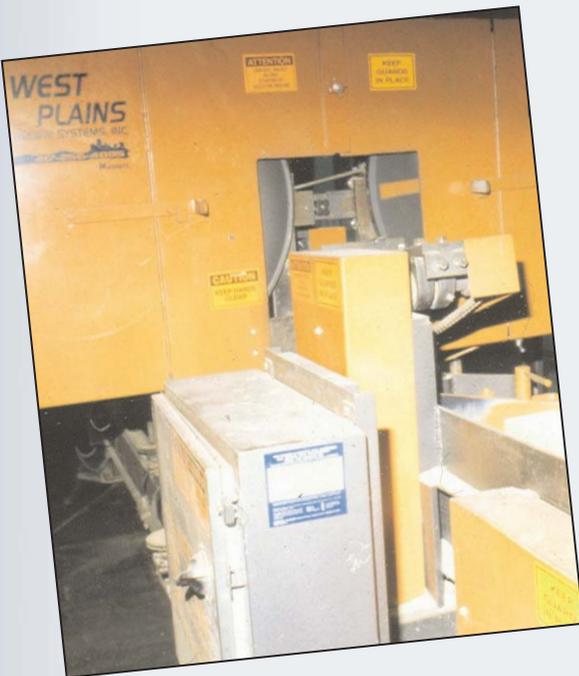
PHOTO: Resaws at the mill process cants into pallet lumber of various sizes. A new bearing design on the latest units eliminates the need to constantly recheck mounting setscrews.
